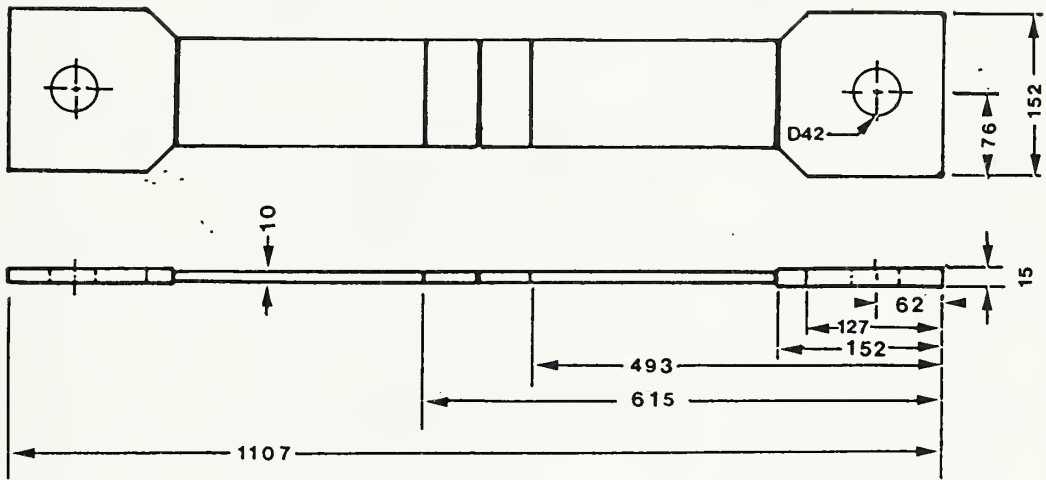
Overall specimen configuration and approximate dimensions in centimeters.
